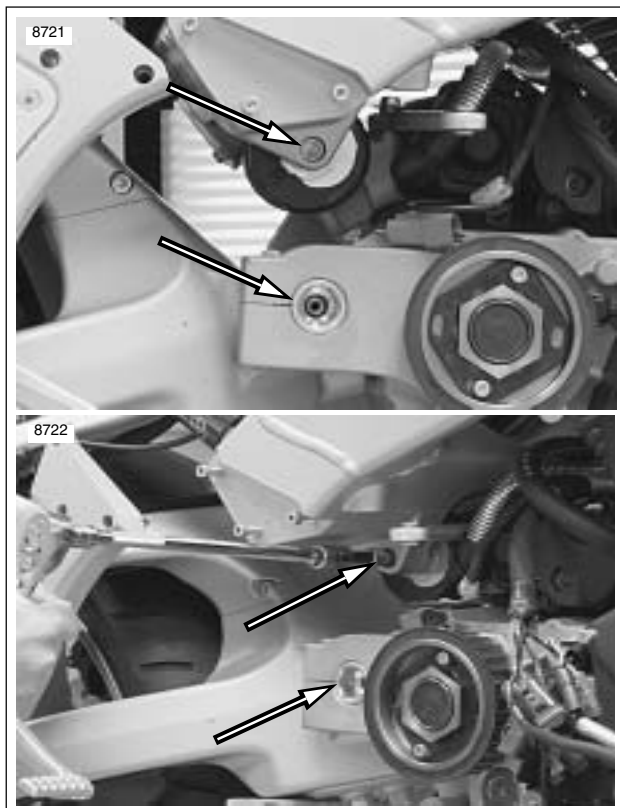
Rear Isolator Bolt and Swingarm Pivot Shaft
